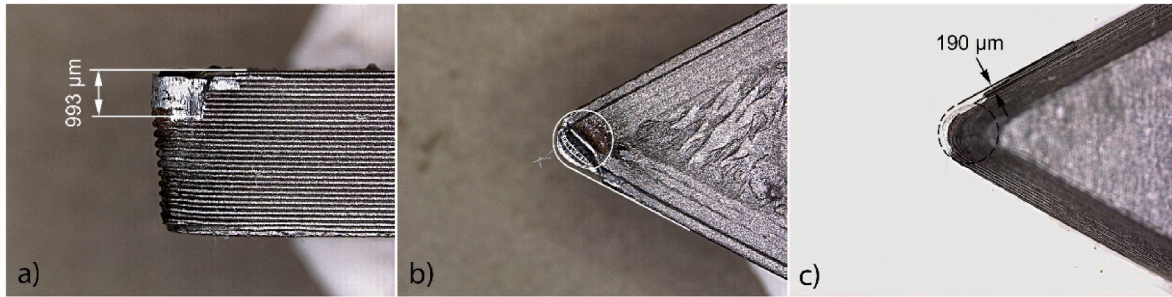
Appearance of the cutting edge at the end of run E5: a) side view, b) top view, d) bottom view ( $V_c = 200$  m/min,  $f = 0.20$  mm/r,  $a_p = 1.2$  mm,  $t = 557$  s).
